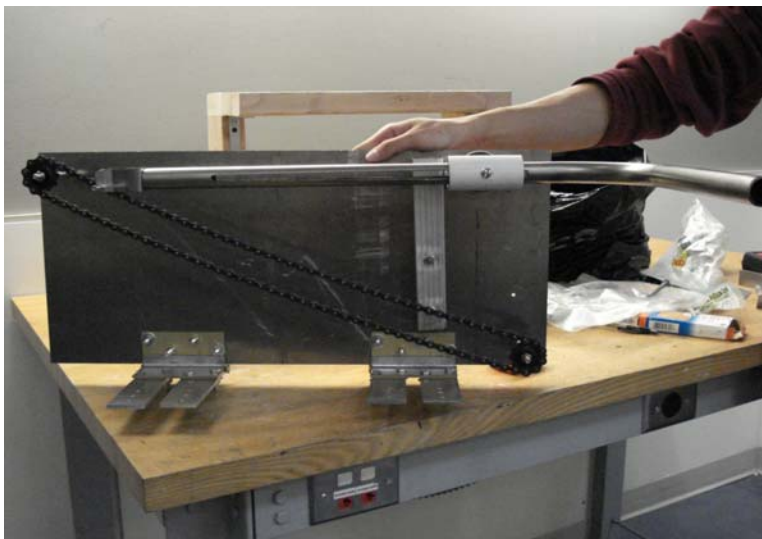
The chain mechanism connected to the rod and sliding collar assembly.
